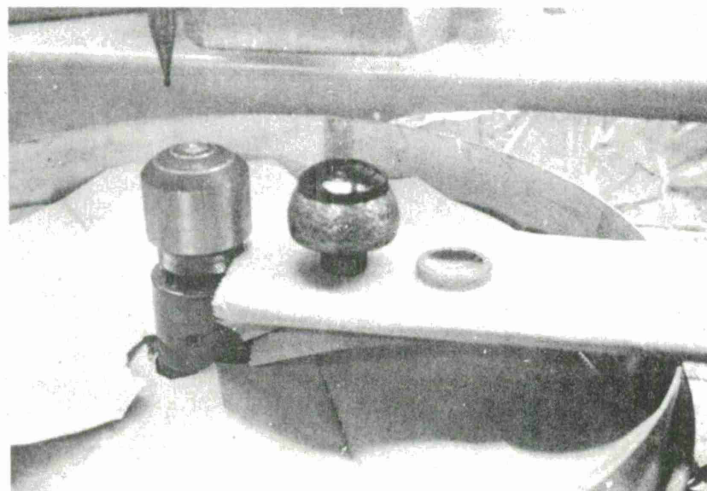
Grinding Tool (On Spindle) and Polisher for -1.251 Inch Radius
